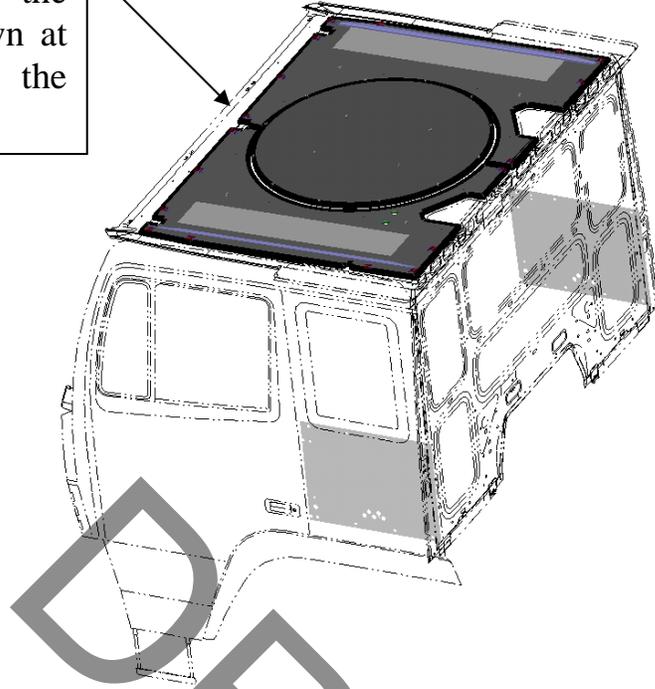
TOP VIEW OF CAB ASSEMBLY
